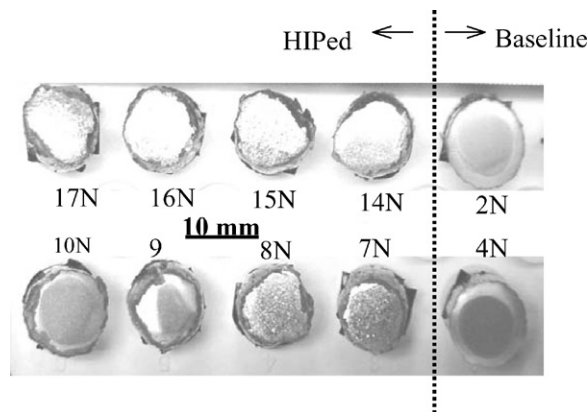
Shear plugs after ballistic testing of 10-mm thick targets with flat projectile. Notice the cylindrical cross section of MIL-T-9047G samples (far right) and the uneven cross section of plugs from HIPed samples. The plugs are viewed from the free surface of the sample.
